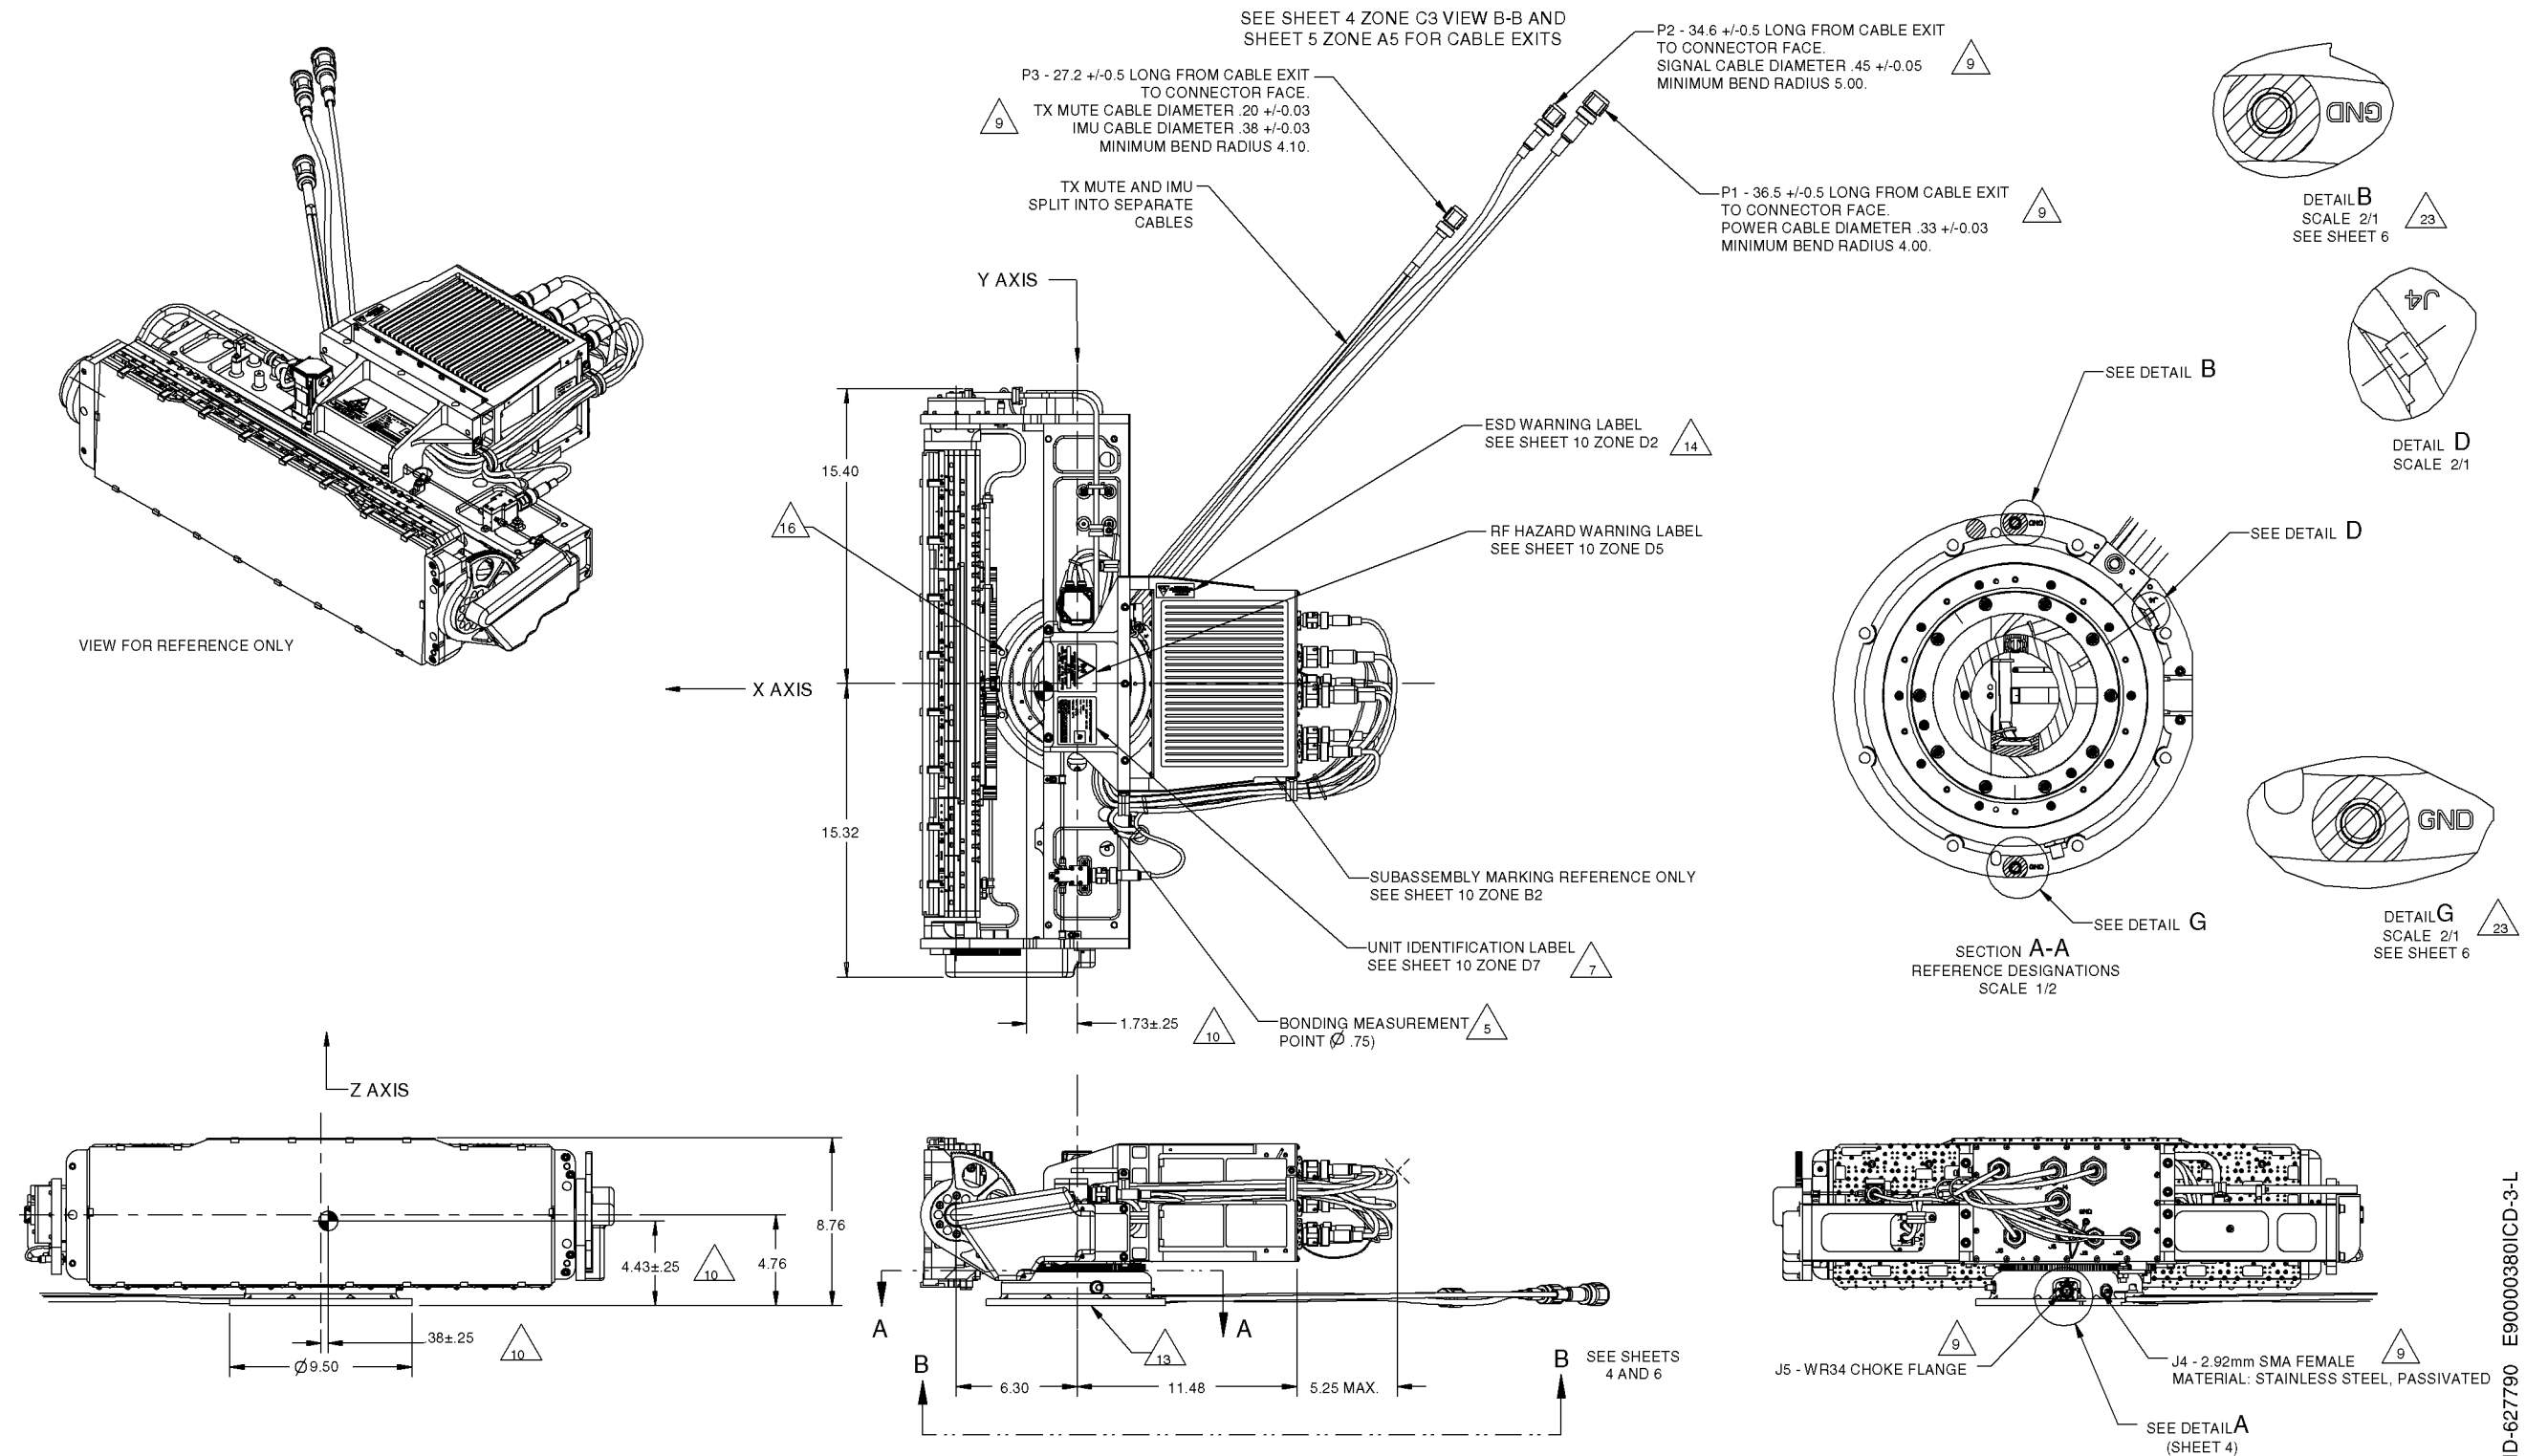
(Sheet 3 of 14) FMA Outline and Installation Drawing (90000380ICD, REV L)
